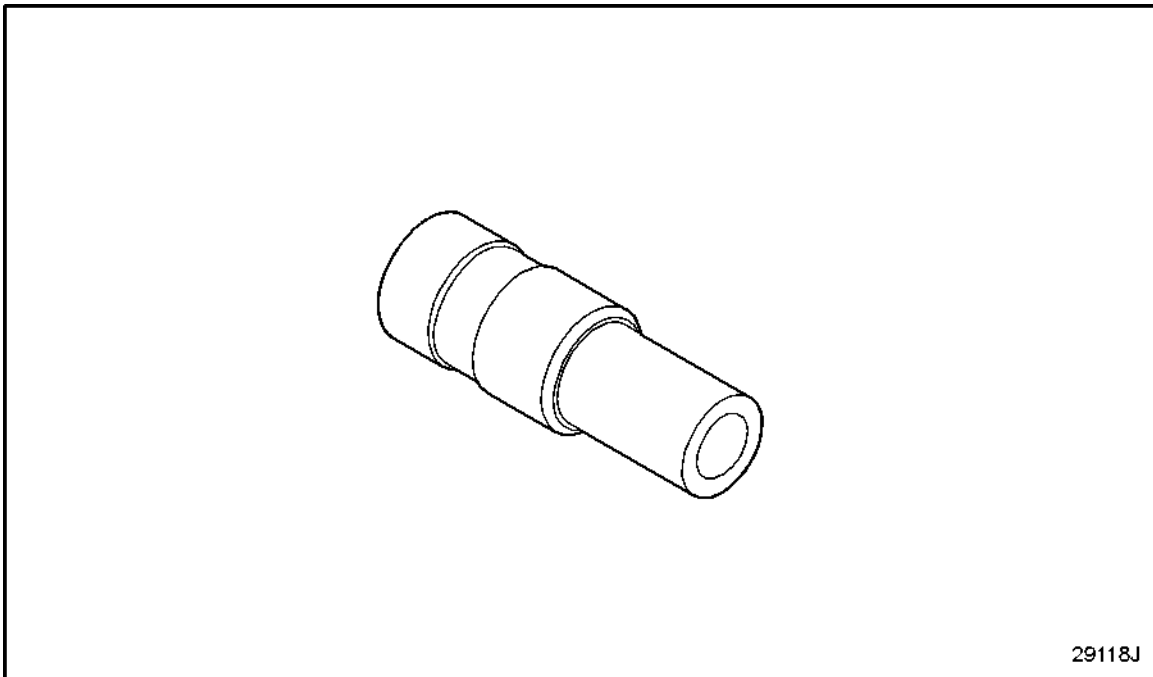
Valve Guide Installer (4 Valve),J 24519
